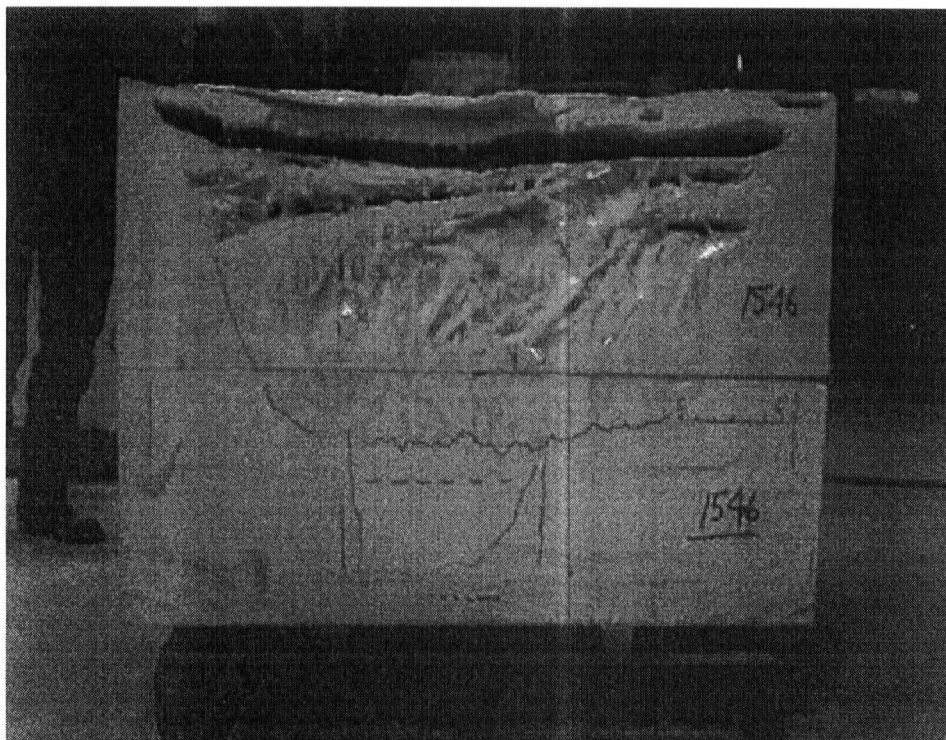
Cross-section of a Standard Operating Practice (SOP) Monofrax-M block taken at the vertical plane bisecting the narrow face of the casting (refer to Figure 1.1). Cracks and voids can be observed and the  $\beta$ -alumina region is being outlined. Note that the cracks are vertical and perpendicular to the broad face of the block resulting from the tensile stress acting parallel to the broad face (tensile stress in direction-2 in Figure 1.1).
